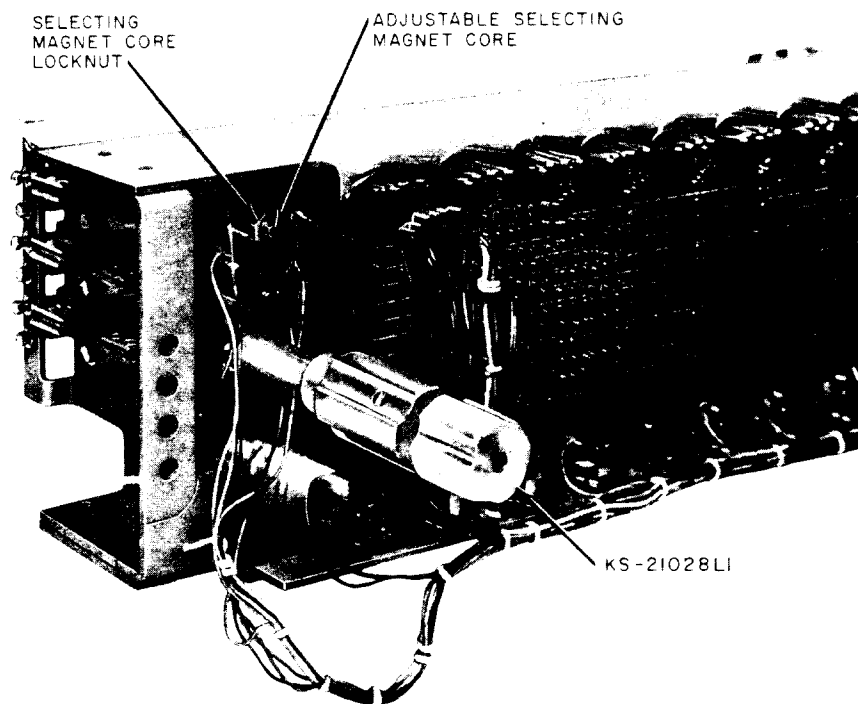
Method of Adjusting Selecting Magnet Core Gap
